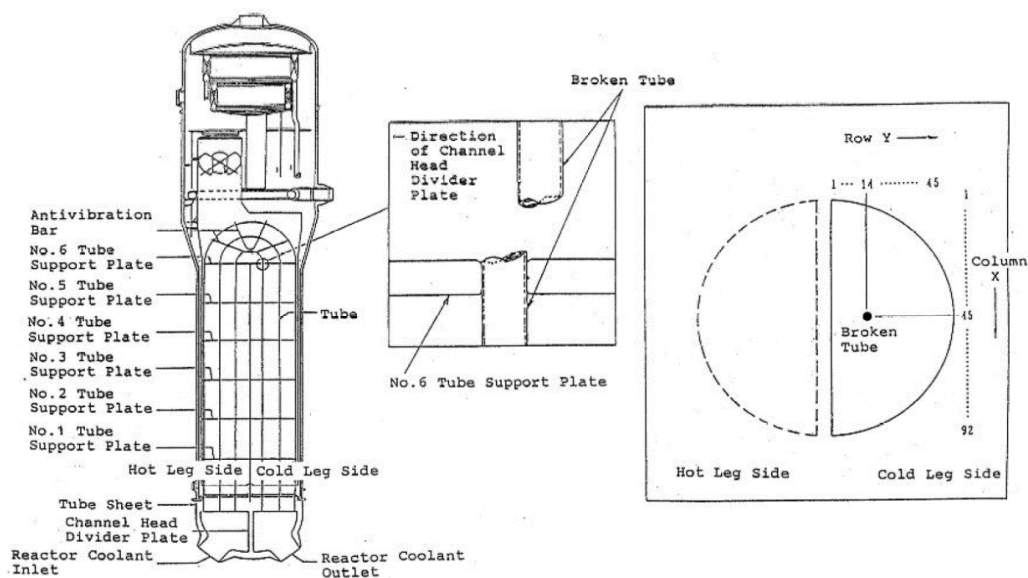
Cross-section shape of a steam generator and position of broken heat transfer tube
